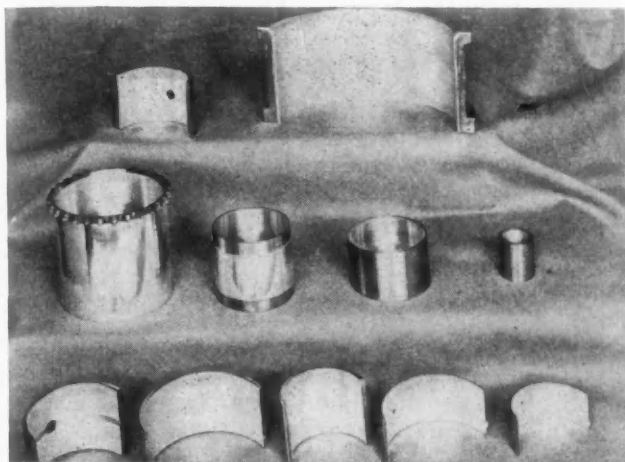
Several types of steel-backed, bonded aluminum bearings
